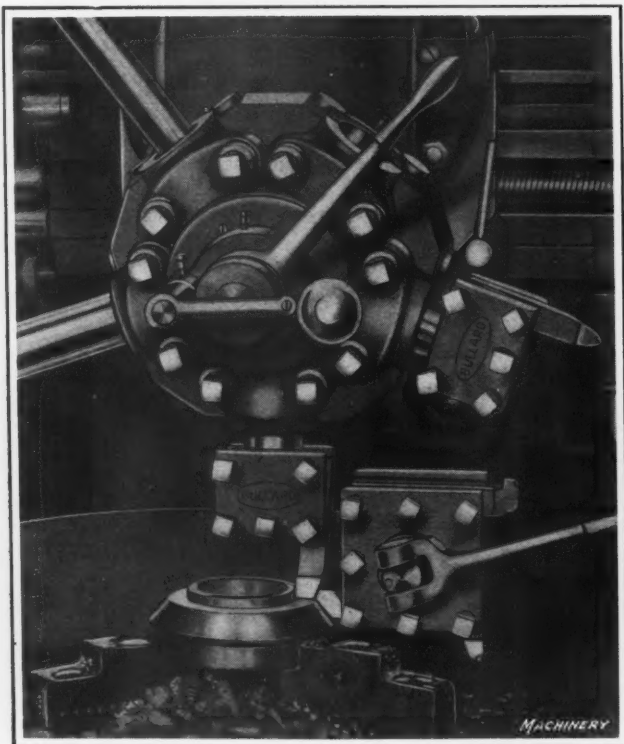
Tools carried in the Main and Side-head Turrets used in Unison as a Forming Tool
